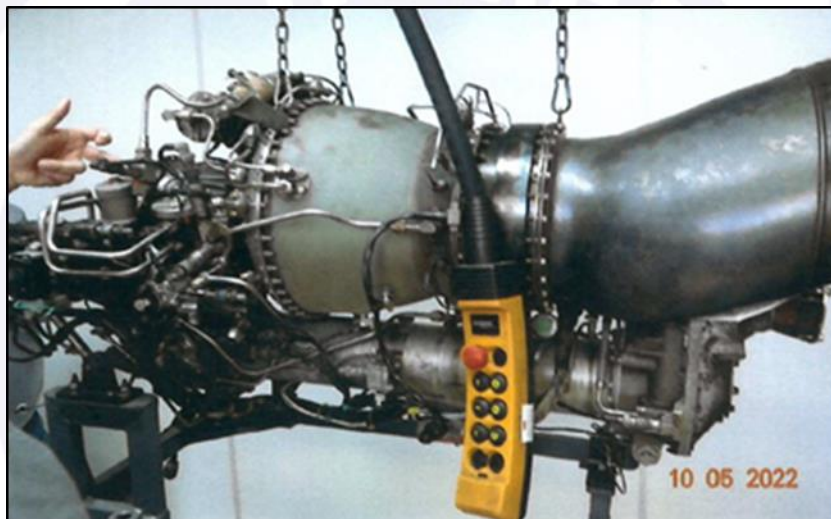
Left-hand side view of the SN 42326TEC engine.
